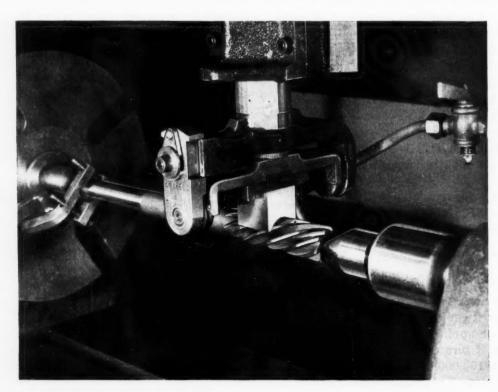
The Superfinishing Process being Used to Remove Burned Cutting Edges and Grinding Marks from a Small Reamer. One Result of the Operation is an Increase in the Tool Life
